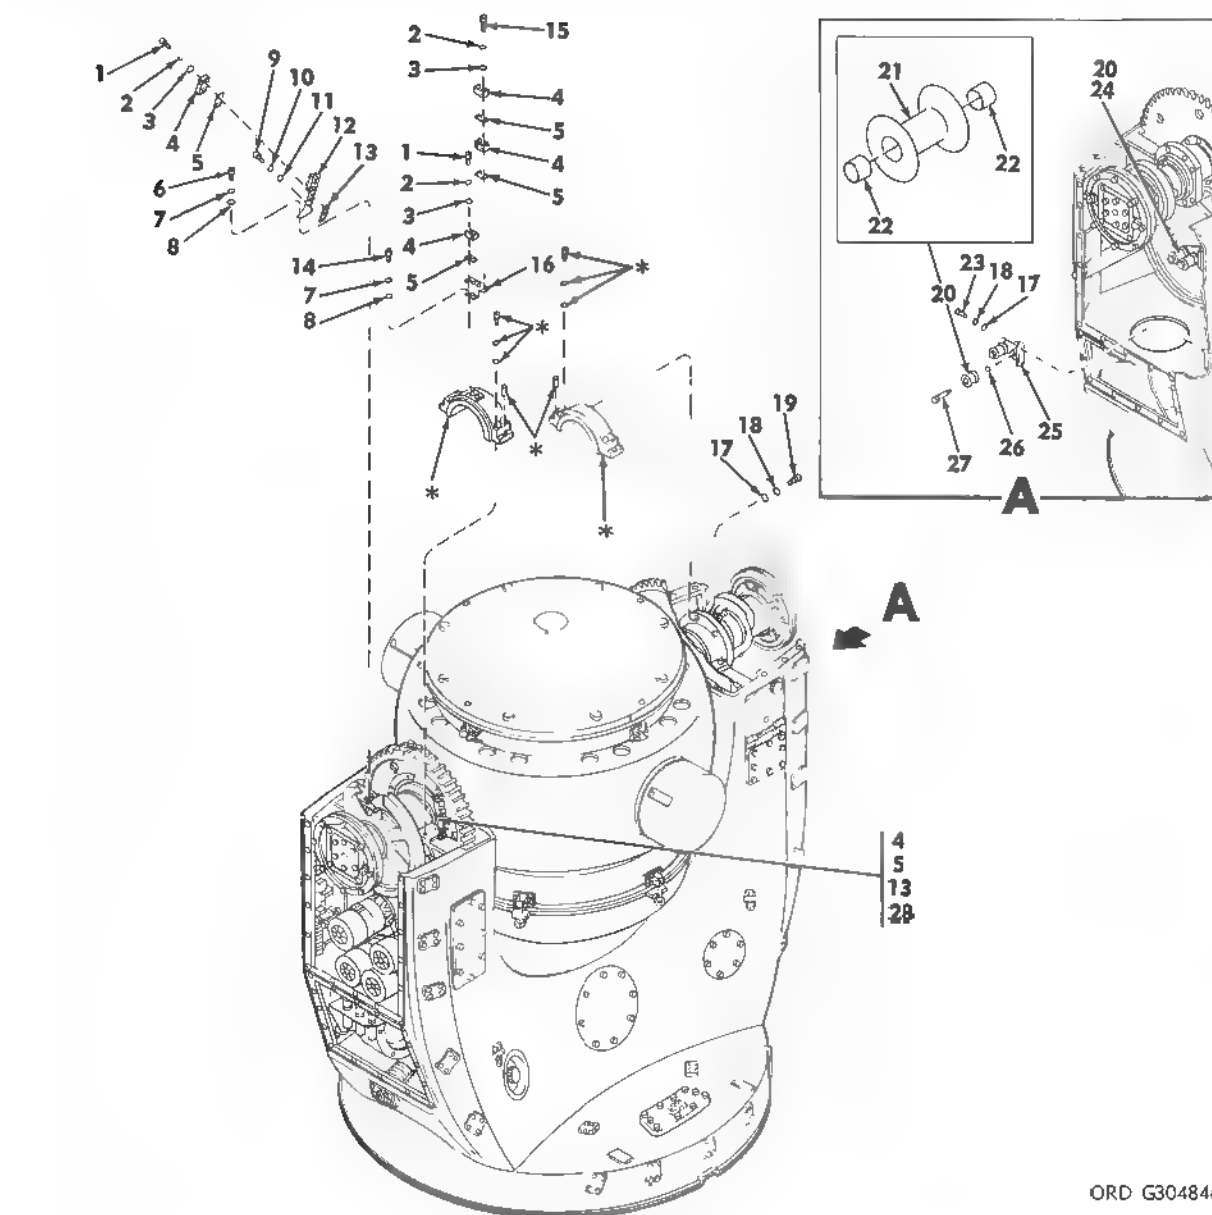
PEDESTAL, ANTENNA 8171625/-PARTIAL EXPLODED VIEW
